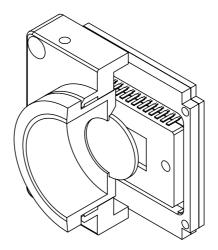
Pike C-Mount dimensions (VGA size filter for Pike F-032)
